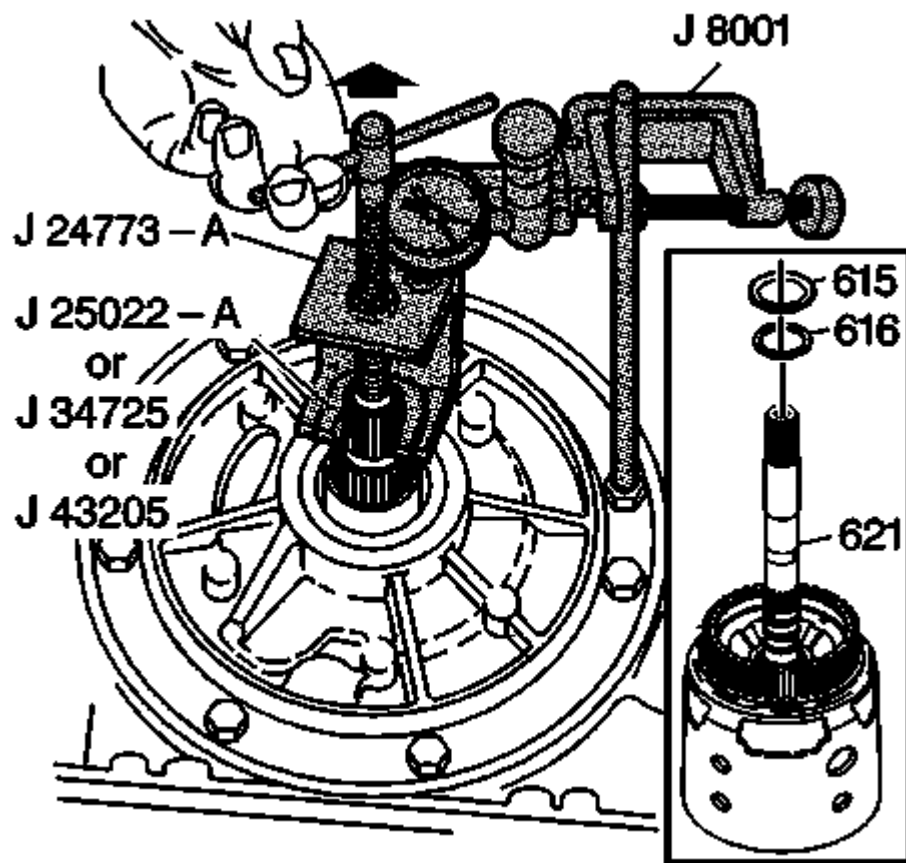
View Of Main Shaft, Retainer Ring & Rear Internal Gear
